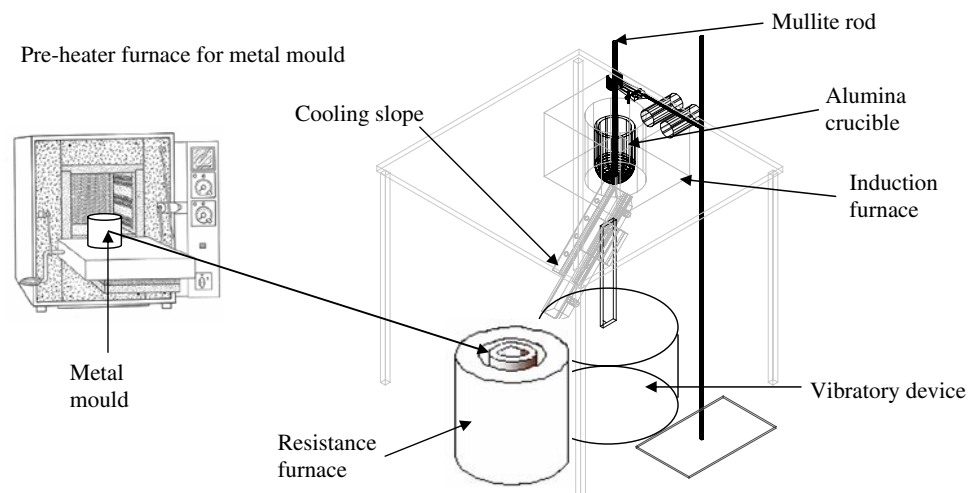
Bottom pouring onto a vibrating cooling slope (and with casting into a preheated mould)
